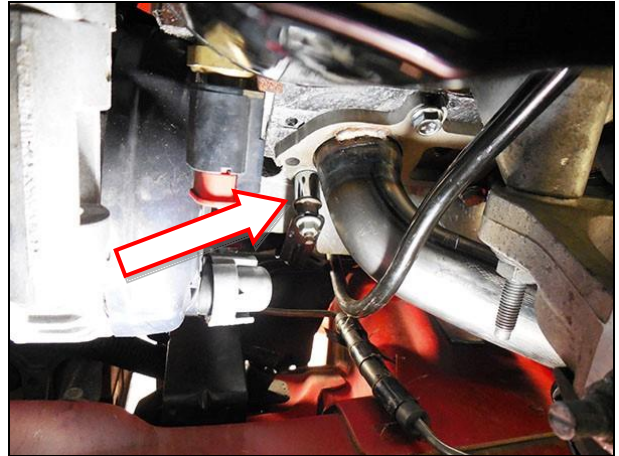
Dipstick tube mounting bracket spacer w/ OEM bolt
